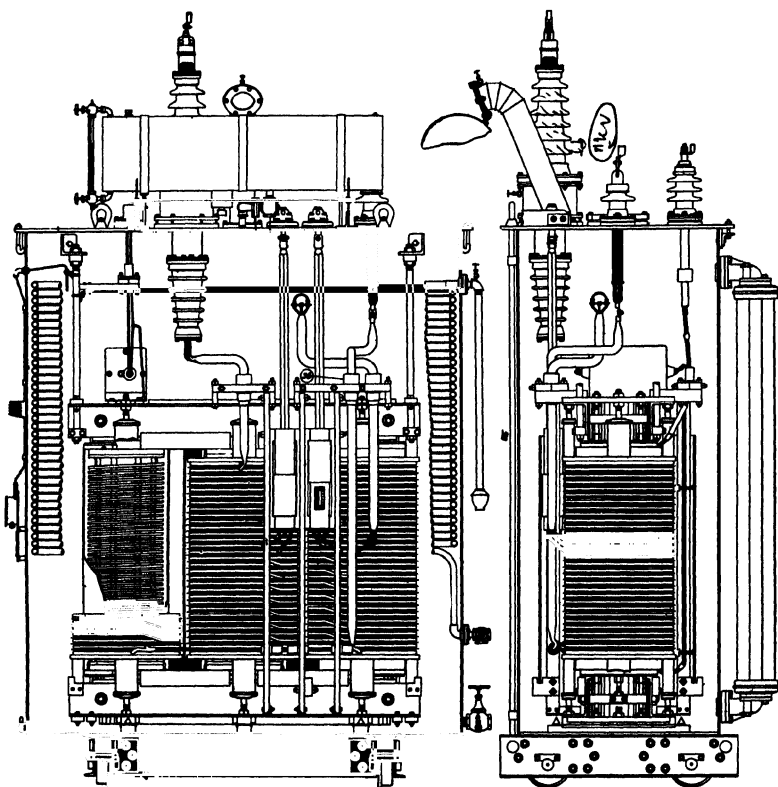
Sectional assembly drawing of three-phase transformer oil and water cooled.
